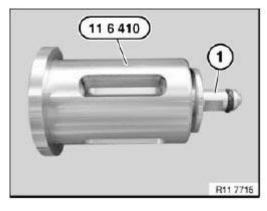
Identifying Screw Piece With Special Tool (11 6 410) Courtesy of BMW OF NORTH AMERICA, INC.
